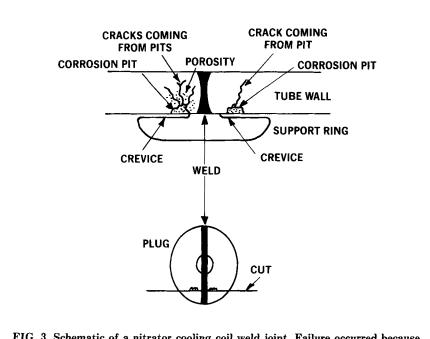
Schematic of a nitrator cooling coil weld joint. Failure occurred because the backing support ring was improperly designed and not consumed in the welding process, thus leaving a crevice (3).
